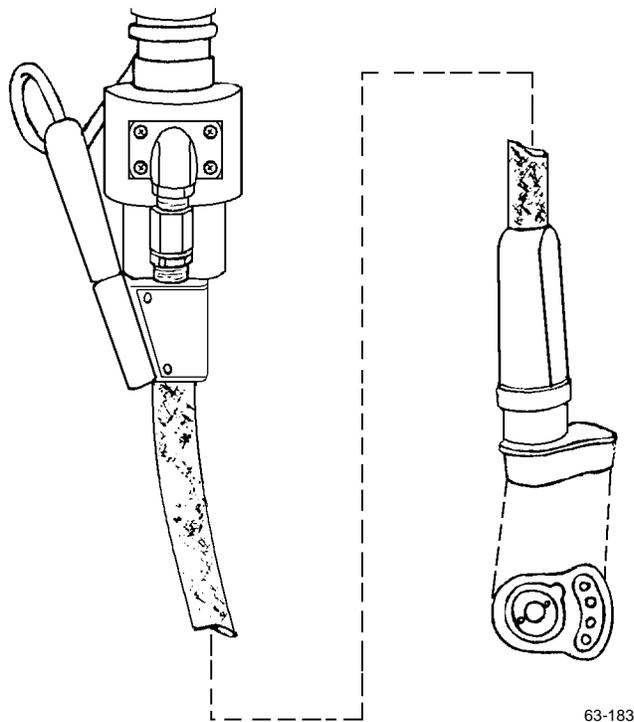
Oxygen Regulator Hose Assembly (Typical. Used for Liquid Oxygen Only)
